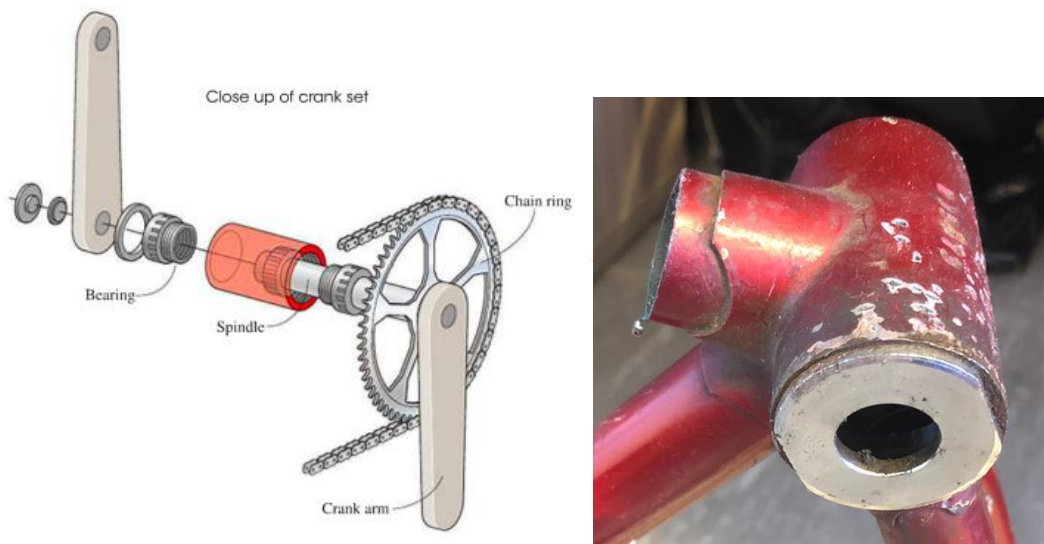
Crankset with the attached gear or chainring. The spindle is shown in red and is the hub that is welded to the frame body. (Meriam & Kraige, 2011)
